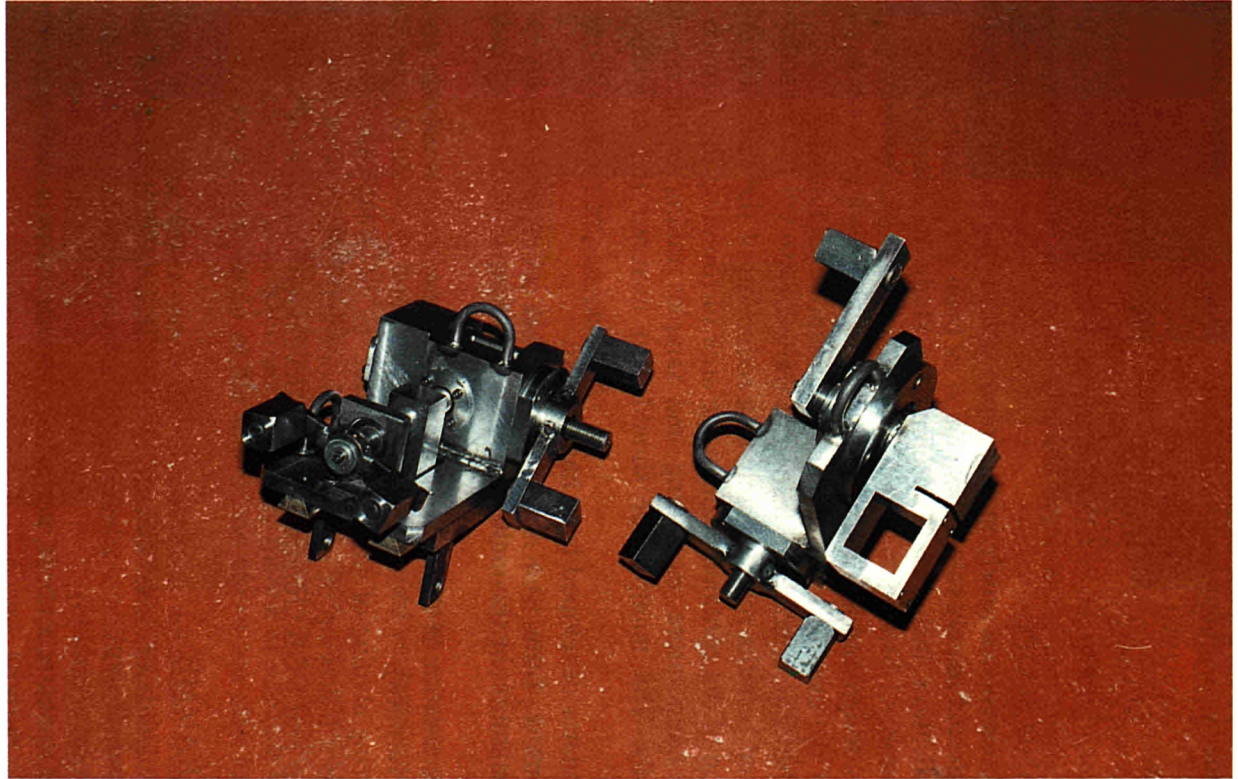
SUPPORTS FOR THE CUTTING TOOLS
